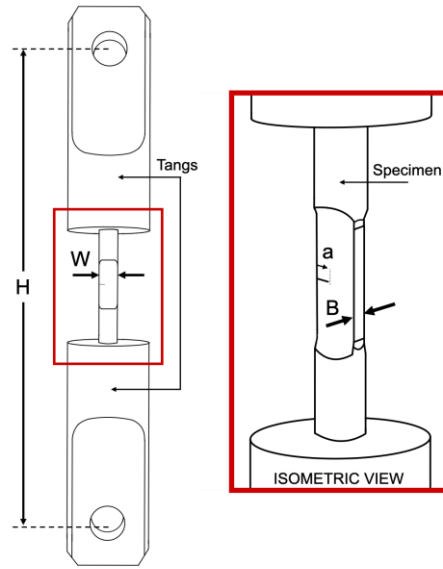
SEN(T) specimen and model geometry with zoomed isometric view for detail.
